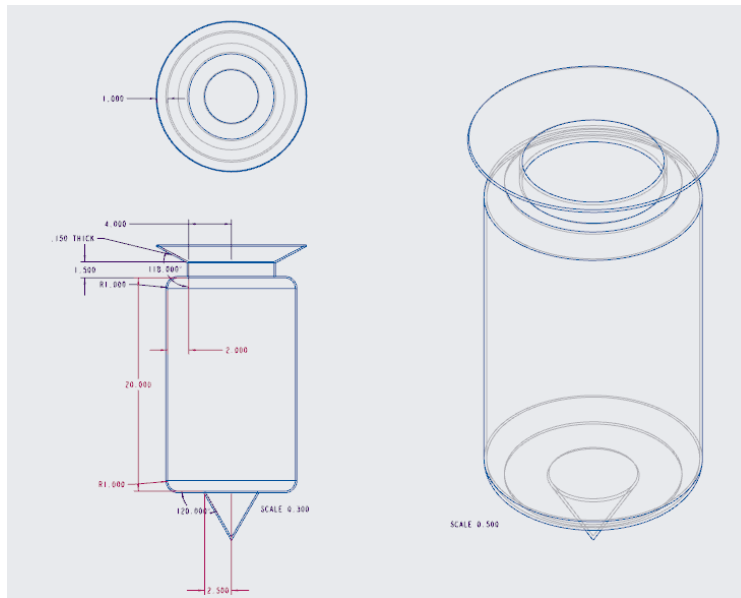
AquaHarvest engineering drawing — front view, top view, and isometric. All dimensions in inches.
